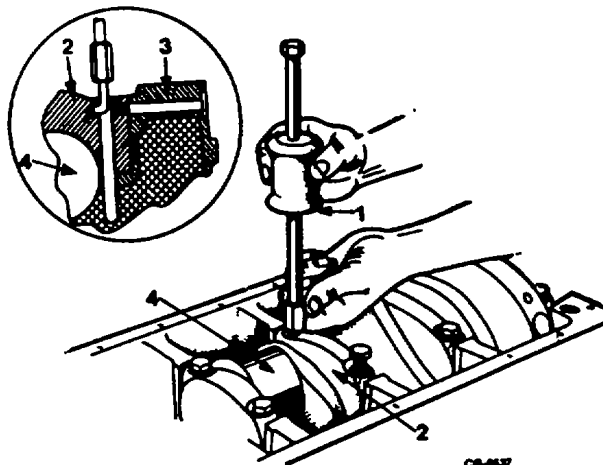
Removing Main Bearing Cap (Numbers 1, 2, 3, and 4)
